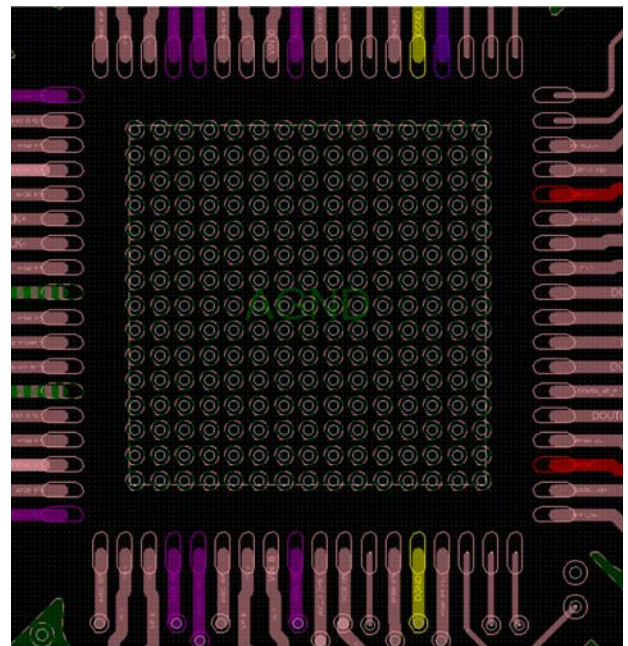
Recommended PCB Layout of Exposed Pad for the [AD9694](#)
